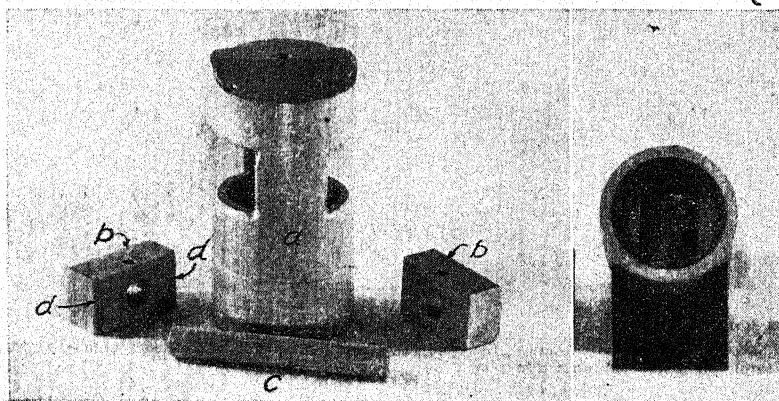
, left, parts of piston made from tube; right, looking into crank end of finished piston.
